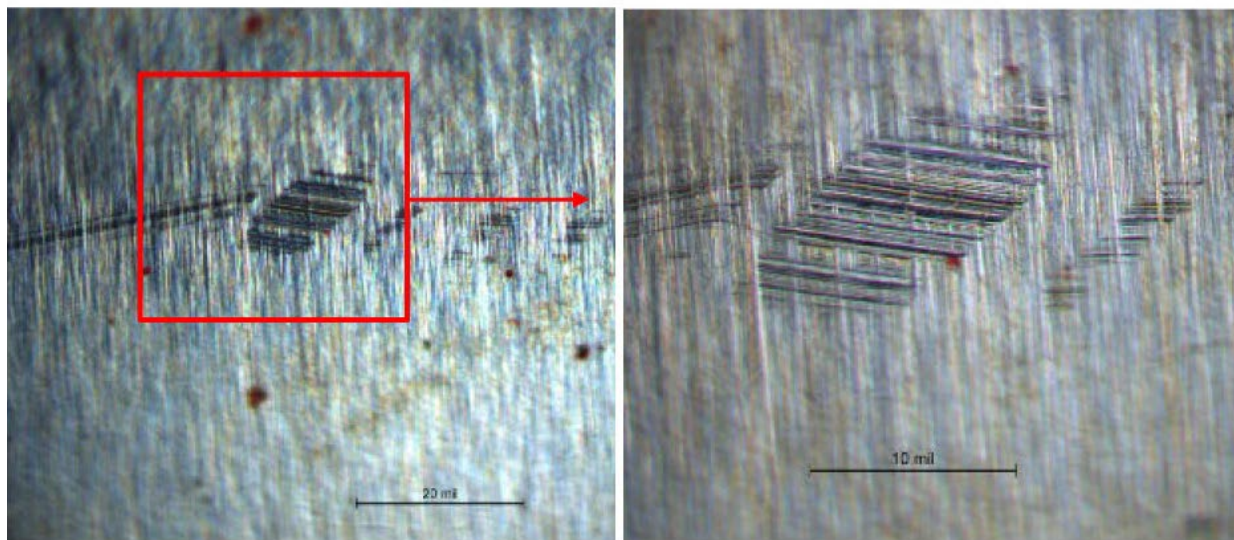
Wide field image showing the indications from brake rod pin #4. The indication is within the red box in the left picture and is shown at greater magnification in the right picture. Courtesy of Boeing.
